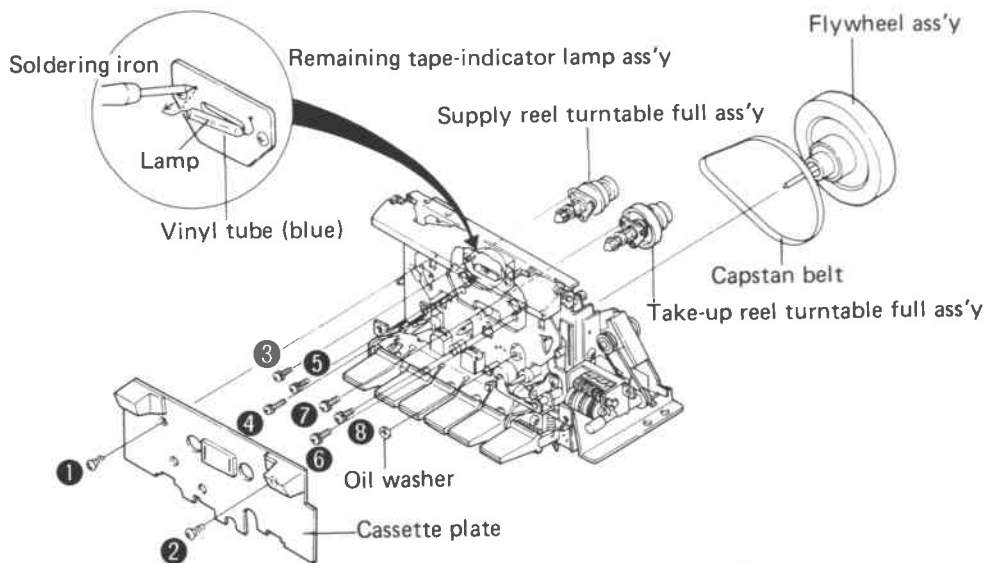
Tape indicator lamp, reel turntable and belt replacement
